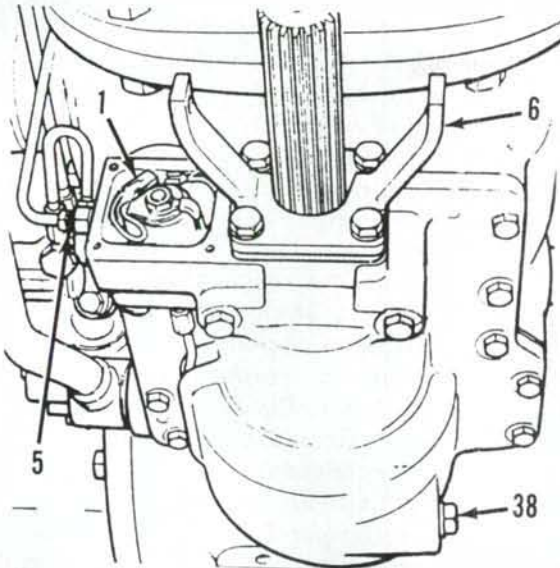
View of front-wheel drive transfer case installed. Solenoid energizing wire (1) is routed through tube to housing. Bracket (6) attaches drive shaft shield.
